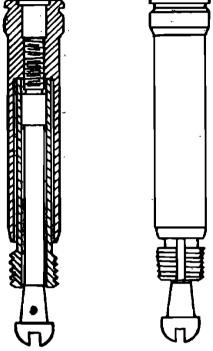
Plug, Clearing, Besa 7.92 m/m., Mark I
